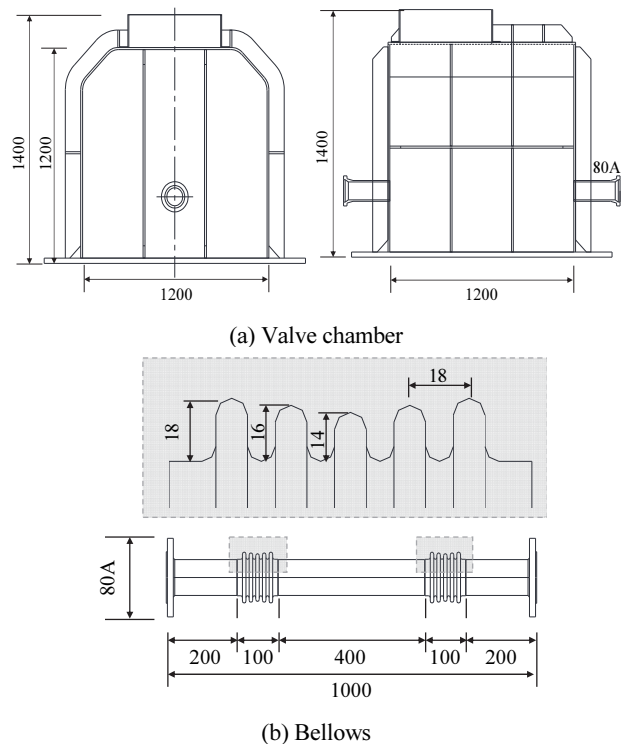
Shape and dimension of tested specimens (unit: mm)
